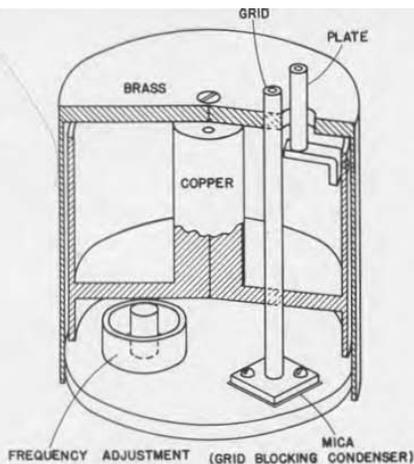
Sectional view of the tank circuit showing details of assembly
